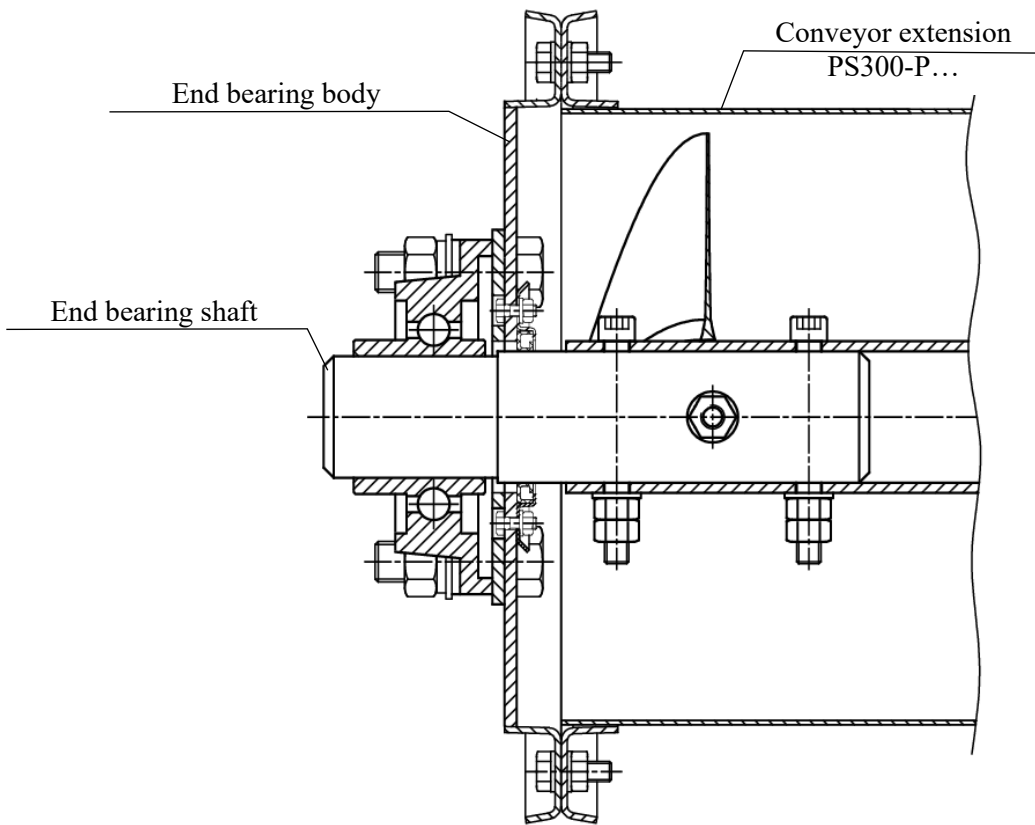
Installation of the end bearing shaft unit of the PS300 conveyor.
